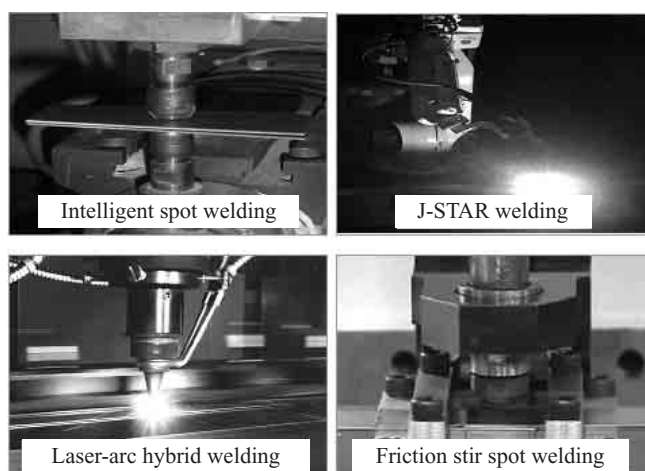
Newly developed welding technologies for assembly of automotive body
